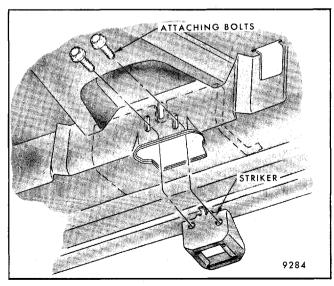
Typical Rear Compartment Lock Striker Mounted in Lid
